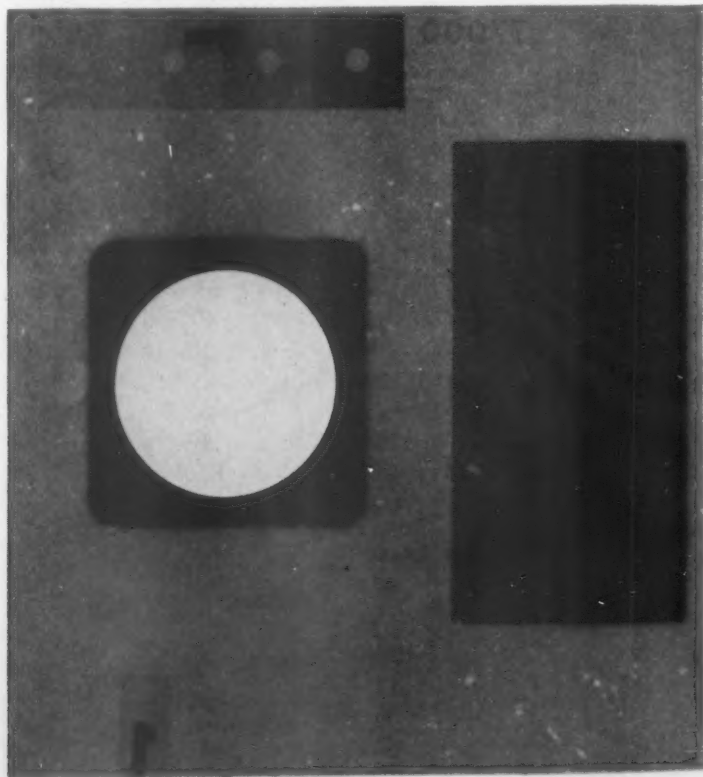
RADIOGRAPH OF CASTING MADE WITH HIGH INJECTION RATE. NOTE POROSITY CAUSED BY METAL SPRAYING INTO MOLD CAVITY.
